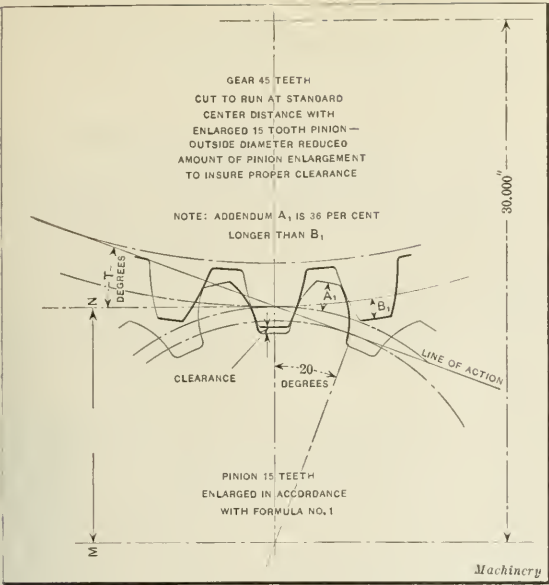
Pinion enlarged according to Formula (1) engages Gear properly at Standard Center Distance of 30 Inches
